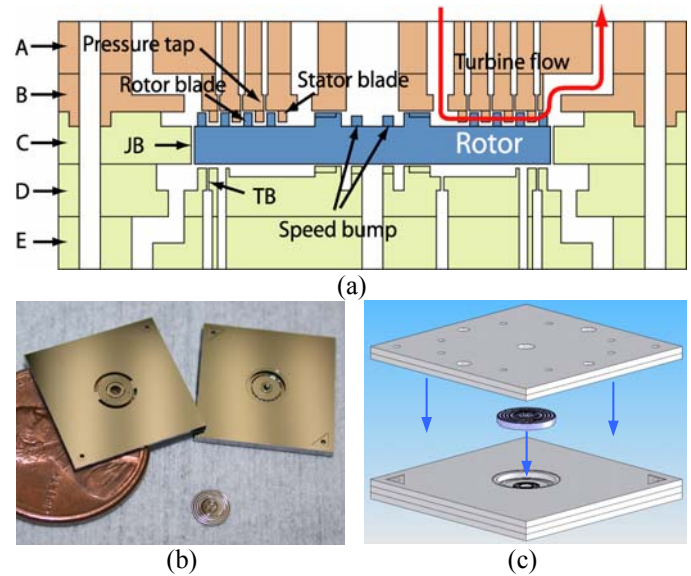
Configuration and assembly of the device: (a) schematic of the device; (b) picture of three pieces; (c) 3D schematic of chip assembly.
